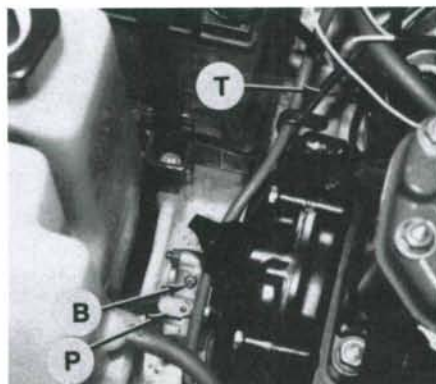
View identifies oil injection pump assembly (P), air bleed screw (B) and transparent outlet hose (T).
